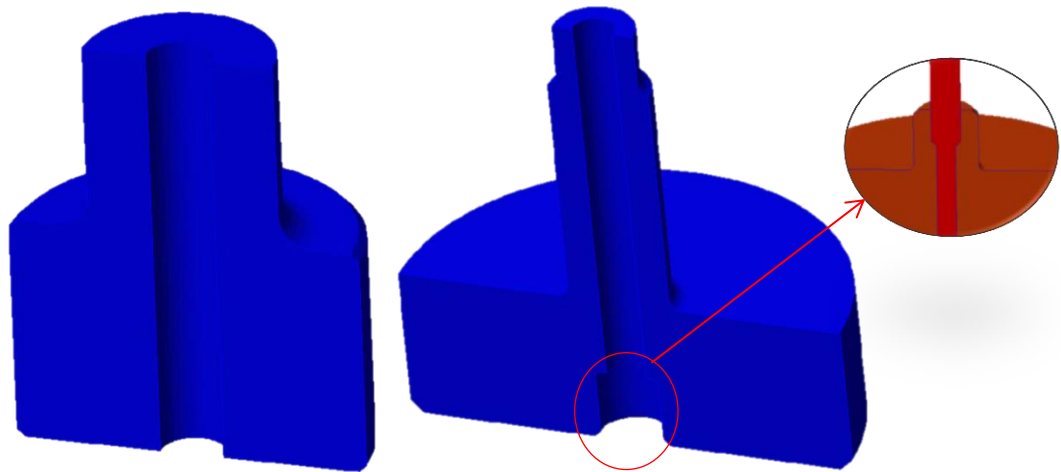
Die-Ring punches details (a) upper, (b) lower.
